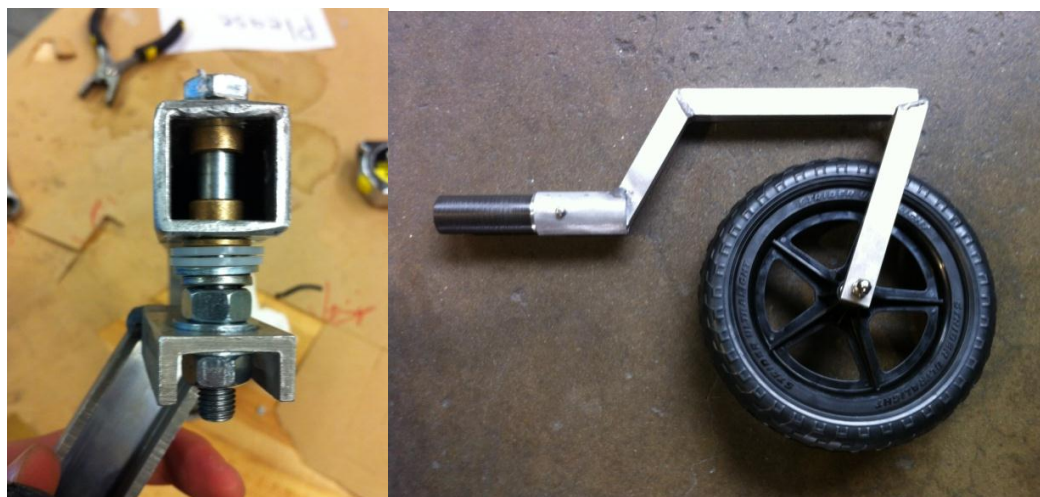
A) BOLT GOING THROUGH THE BRASS BUSHING AND HELD ON WITH NYLON AND METAL WASHERS AND NUTS TO HOLD THE FORK ASSEMBLY TOGETHER AND ALLOW IT TO ROTATE. B) A COMPLETED FRONT FORK ASSEMBLY WITH FOAM WHEEL AND ALUMINUM INSERT ATTACHED.
